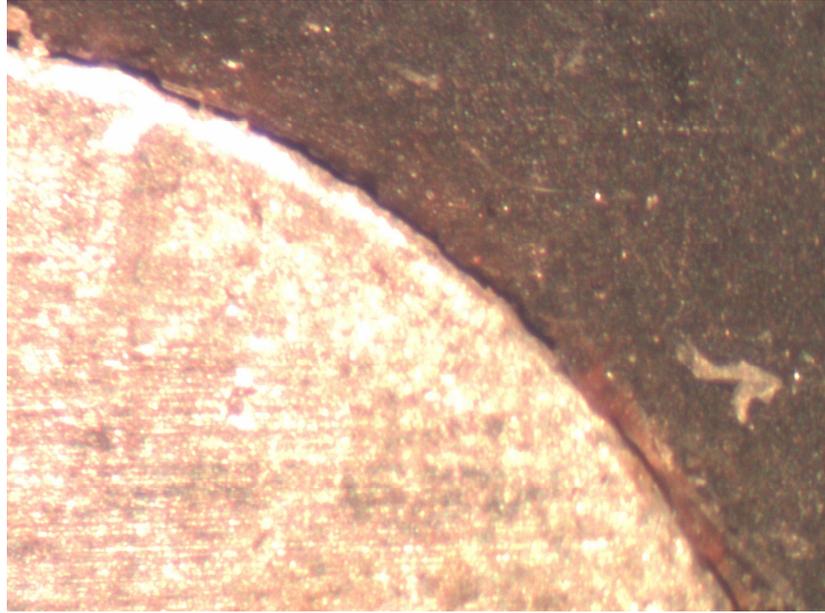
125°C Epoxy 3 on FR4 Test Board Aluminum Edge Crack
